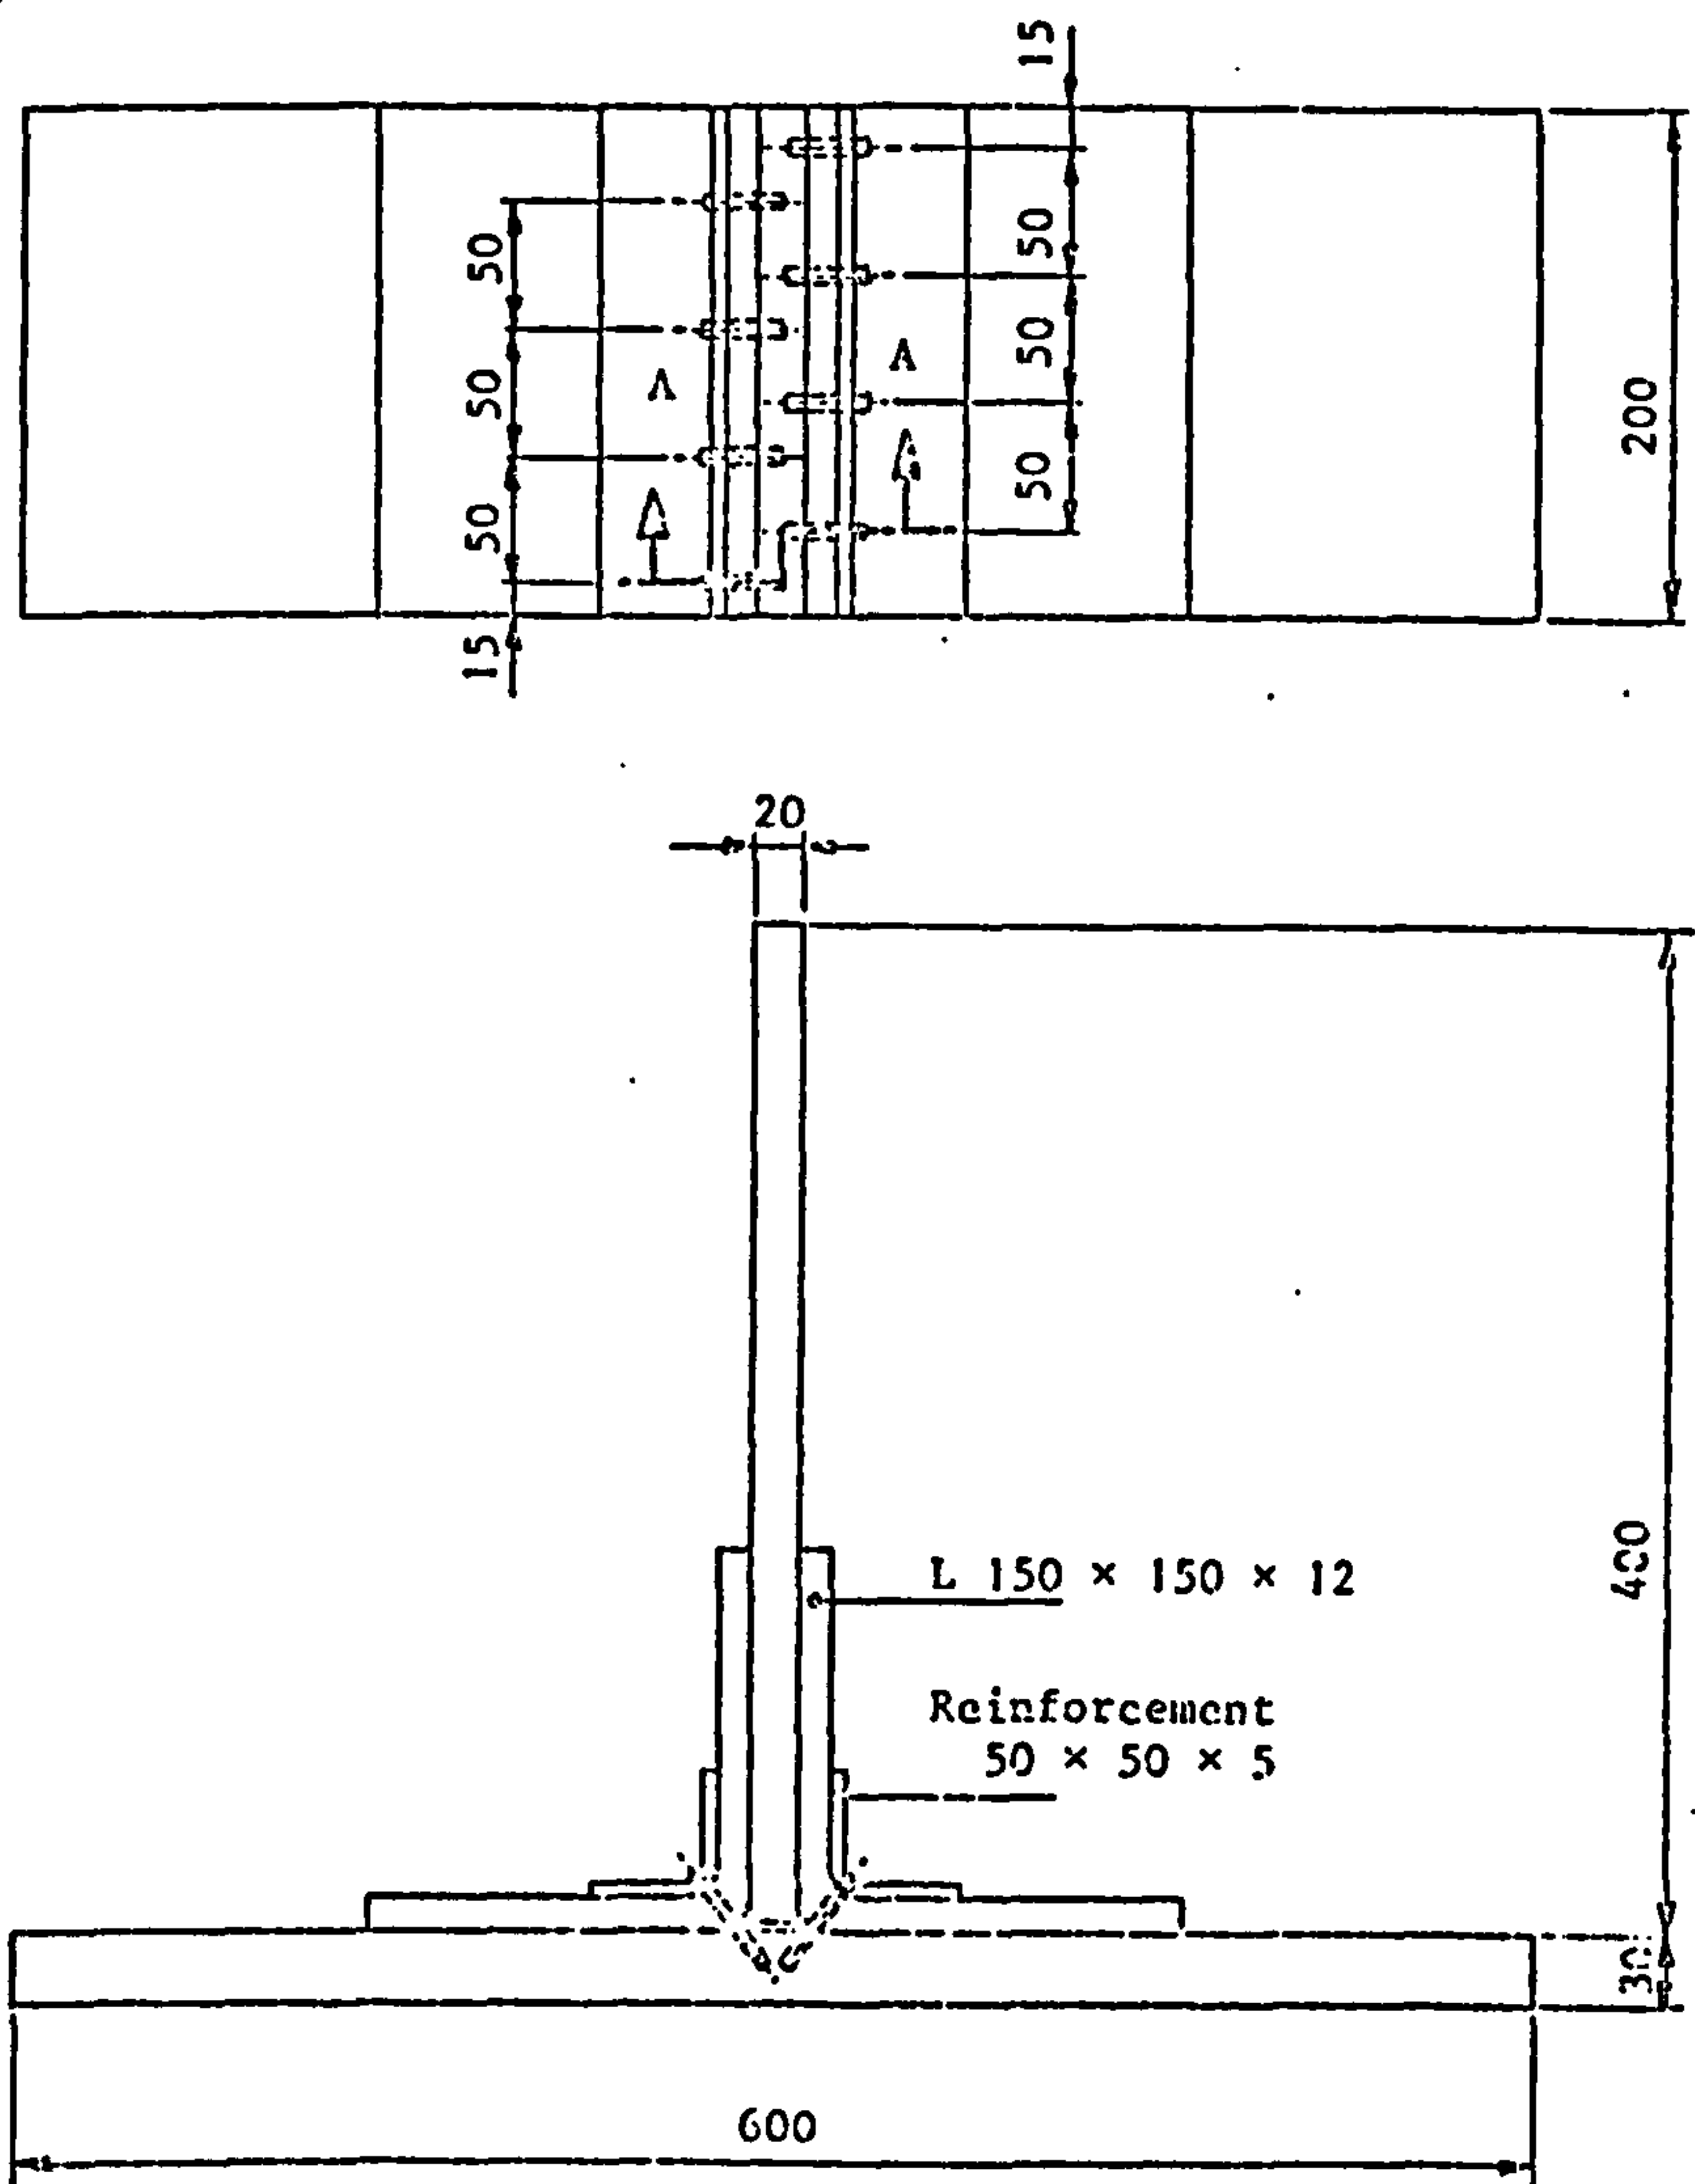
Tee Joint Test Specimen. (Scholte (1977))
